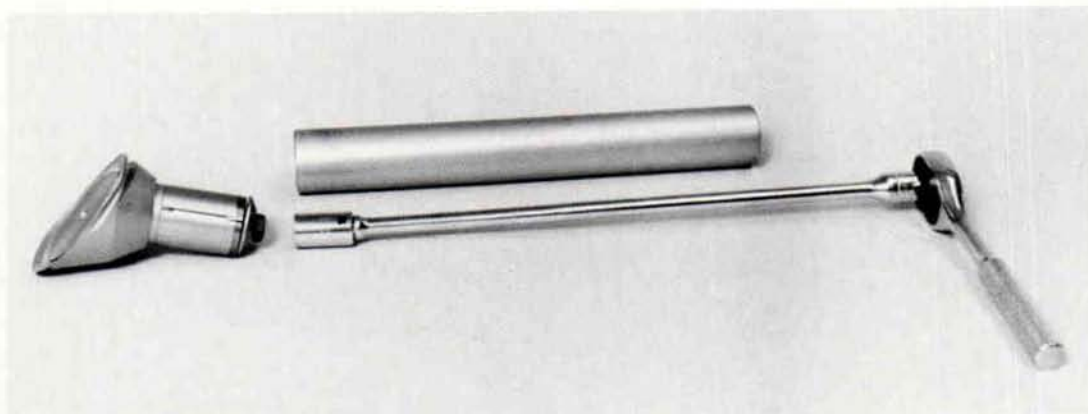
B – An extension socket wrench is required to reach in the pylon and tighten the bolt.
